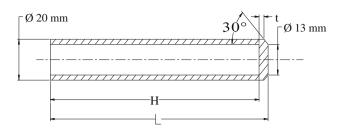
Dimensions of Al-5Zn-1Mg alloy tube
